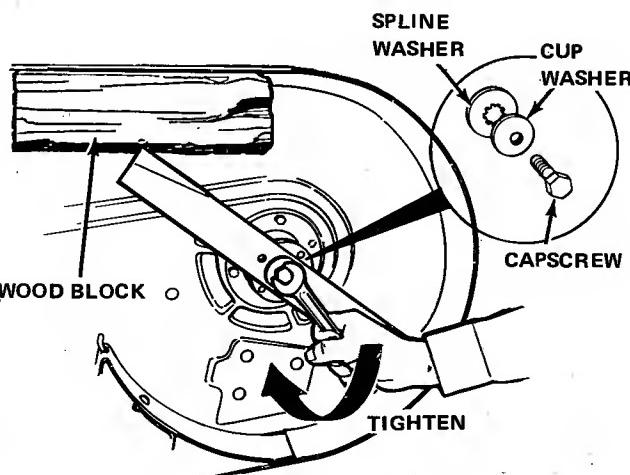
Check, Sharpen, and Balance Mower Blades (Yearly Care or as Needed)
